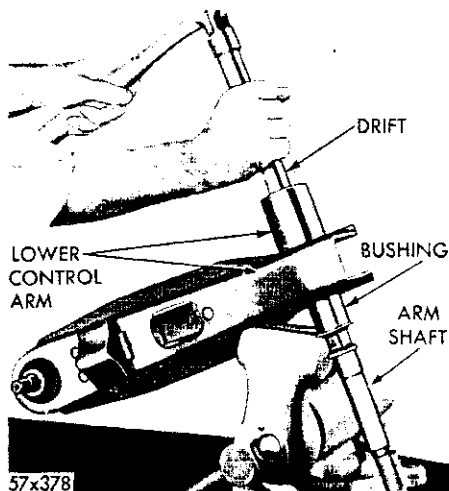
Removing the Lower Control Arm Shaft Assembly
